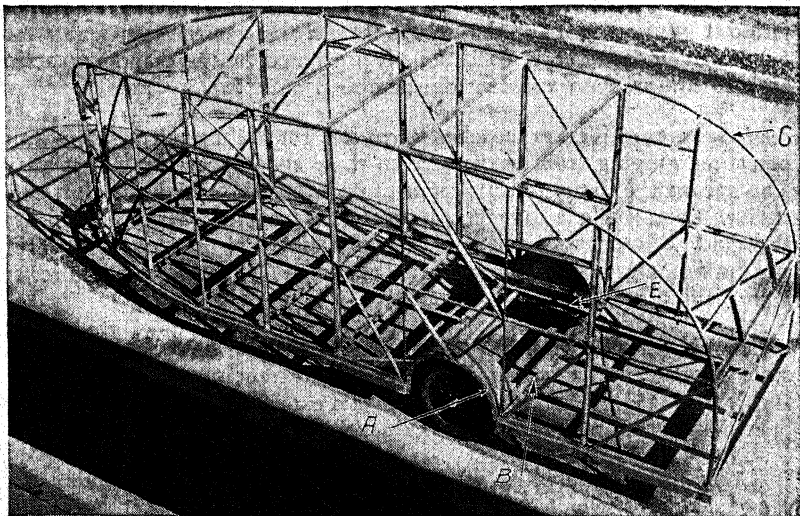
Arc welded house trailer frame showing use of standard shapes.
